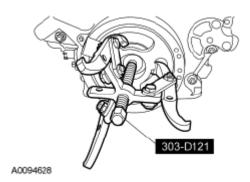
Removing Crankshaft Pulley Courtesy of FORD MOTOR CO.
